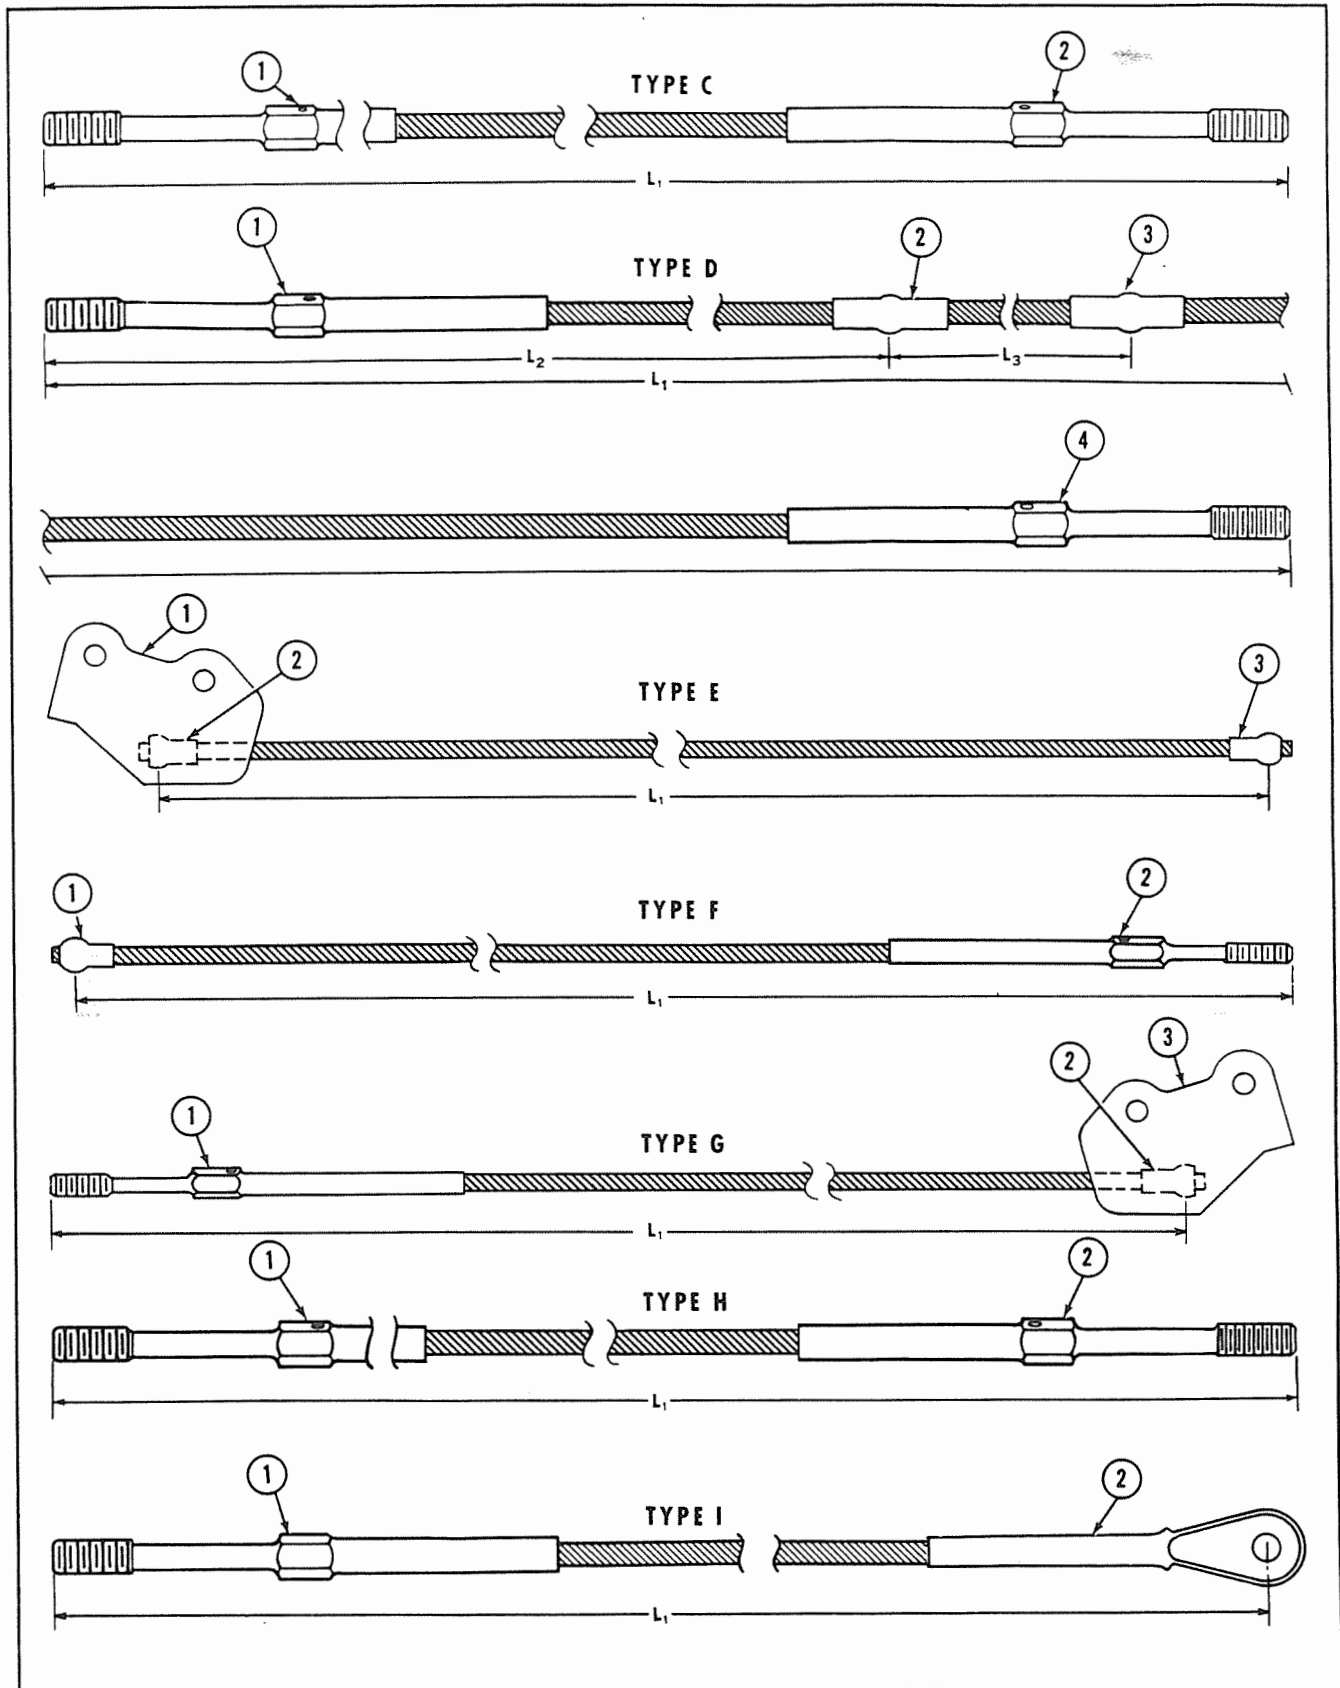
(Sheet 7 of 7 Sheets). Elevator and Elevator Spring Control Tab Control System — Cable Assemblies
